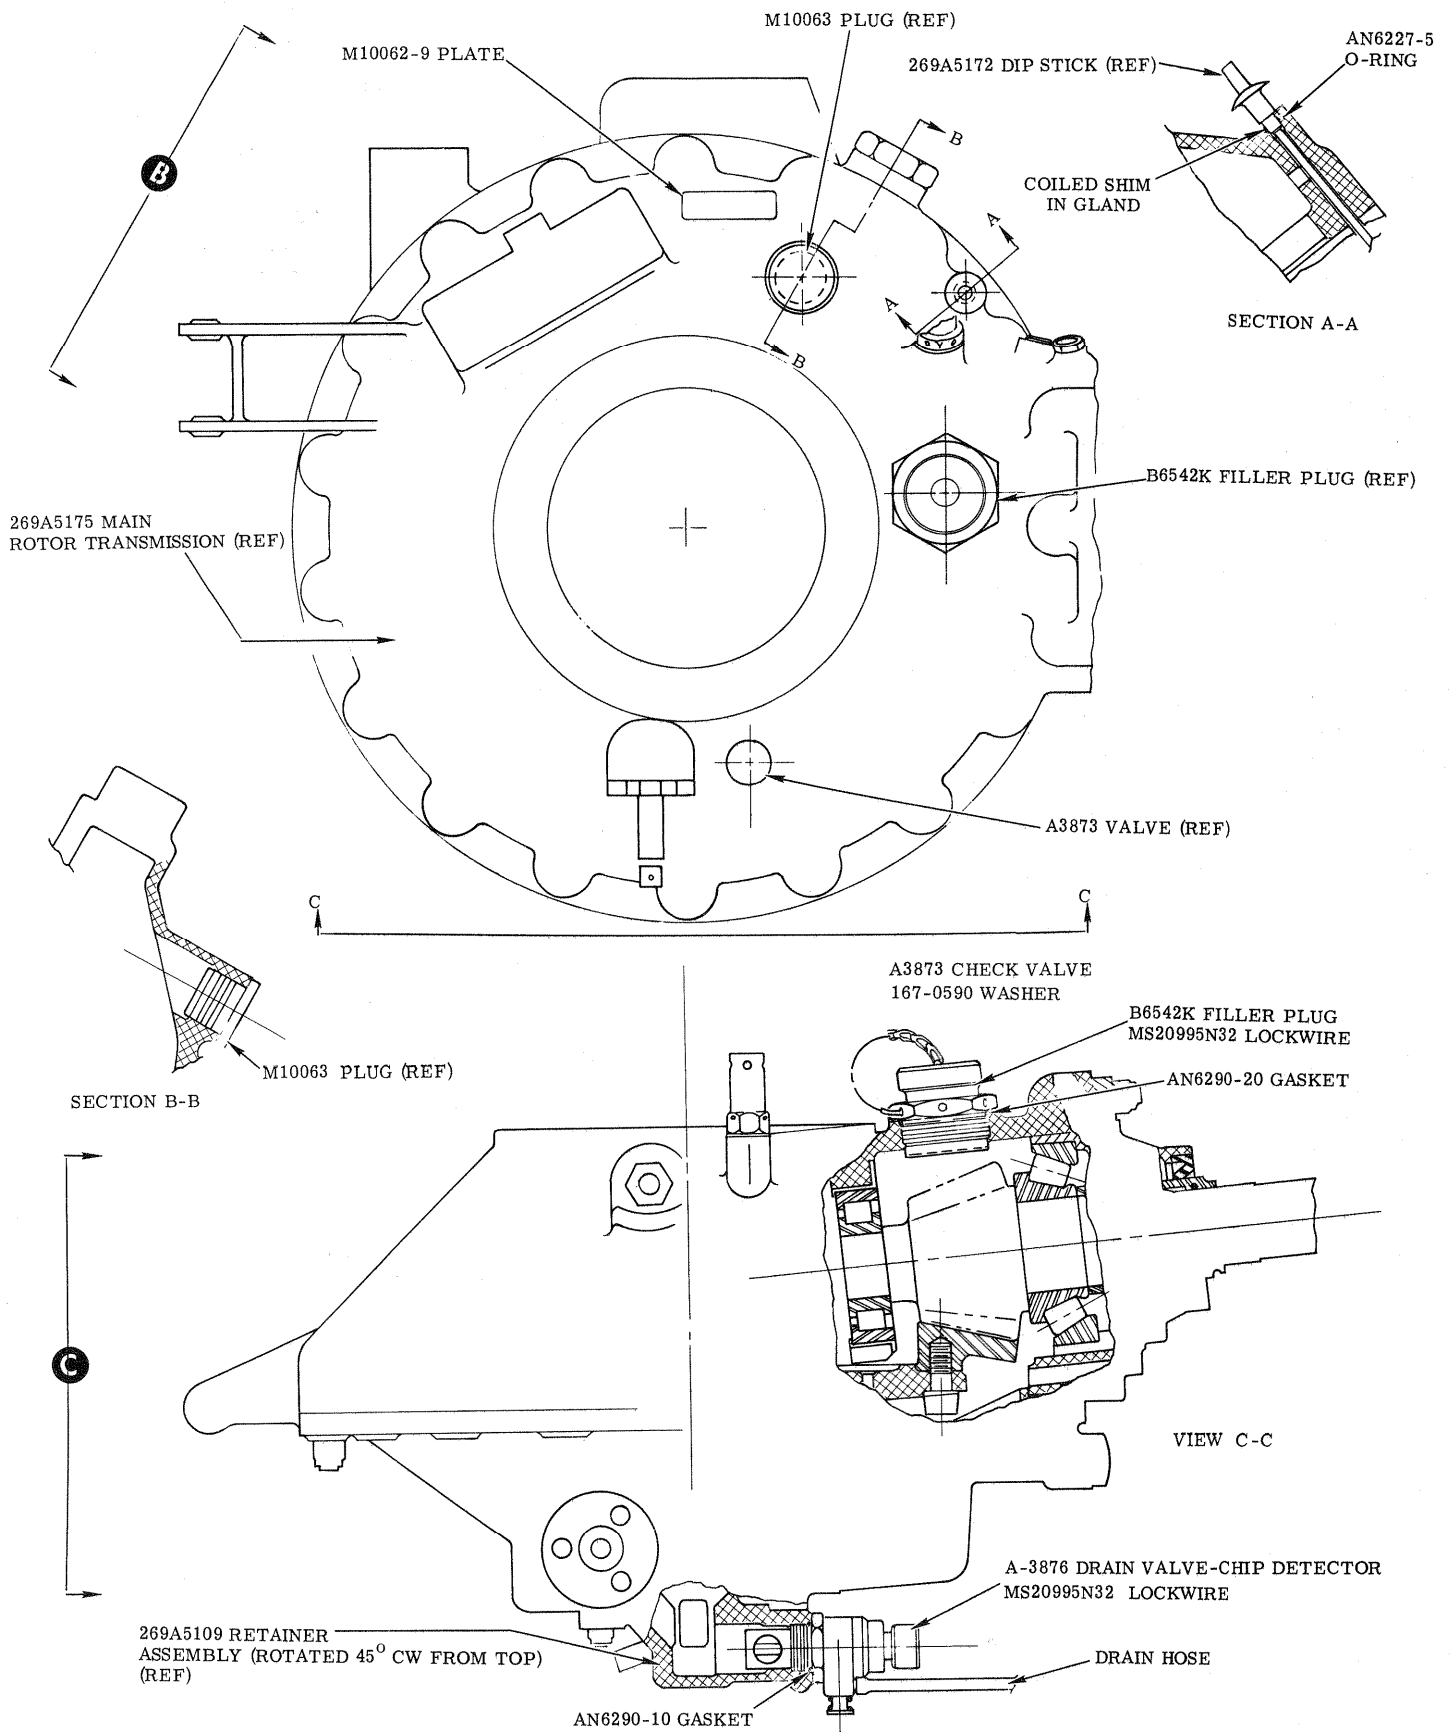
MAIN ROTOR TRANSMISSION-SEALING MODIFICATION (SHEET 1 of 2)
